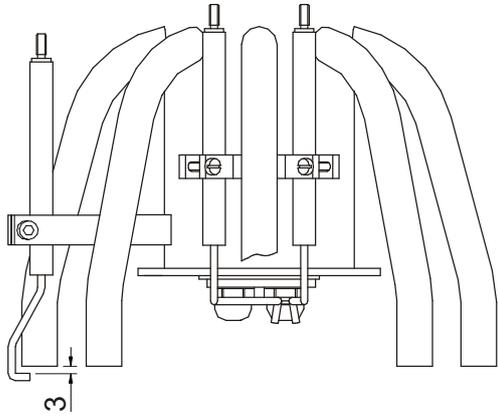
Burner Head Details: Single Spill-back Oil Nozzle Models
